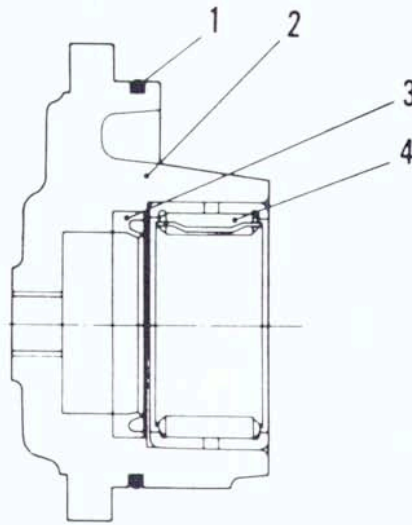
Side cover seal and bearing installation. Be sure open side of "U" packing faces inward.
